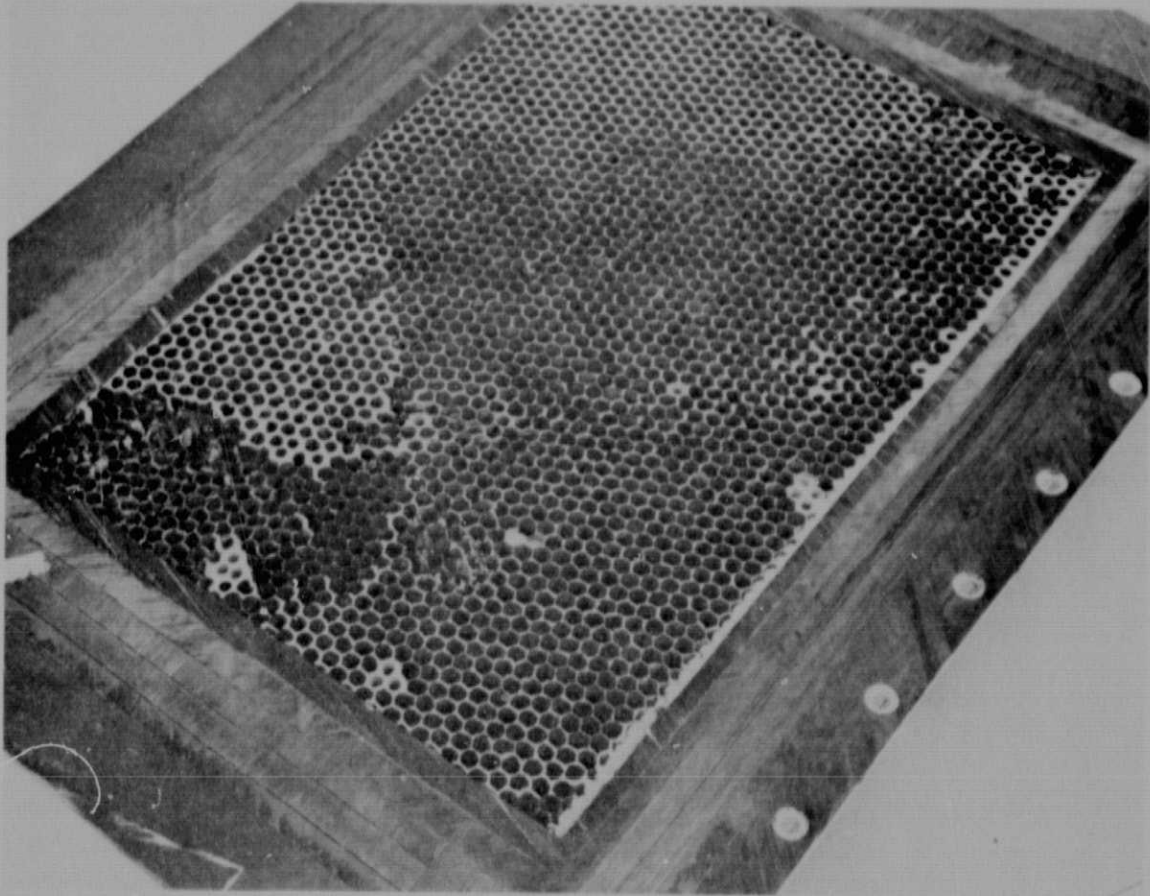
Spoiler S/N 0105 With Section of Upper Skin Removed
